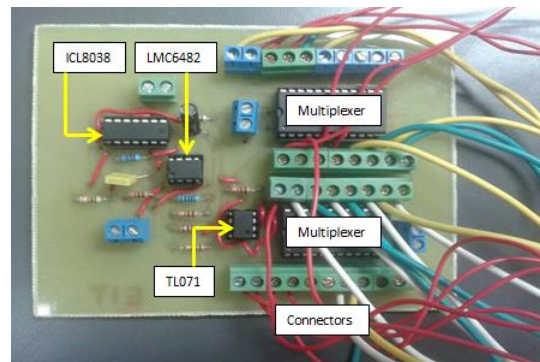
Fabricated printed circuit board (PCB) used in this study.
